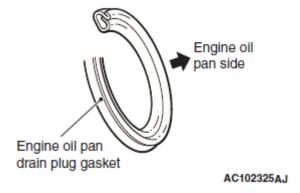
Identifying Engine Oil Pan Drain Plug Gasket
